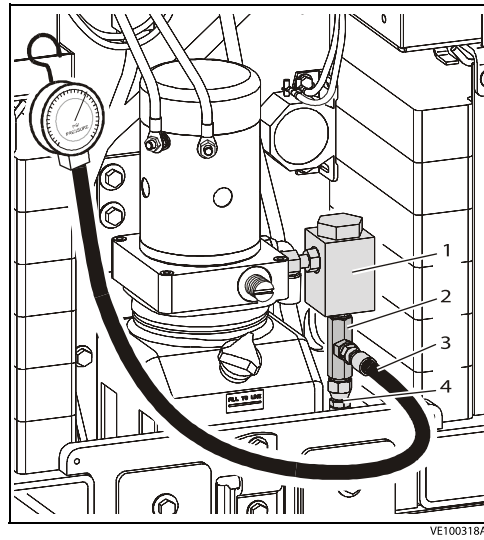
Typical Hydraulic Pressure Gauge Installation (After Hydraulic Filter)
